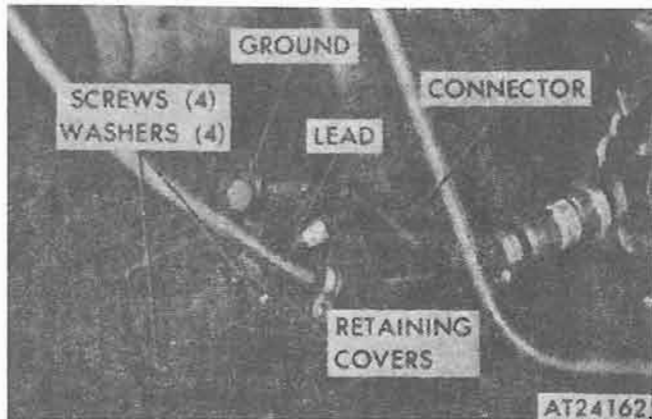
Disconnecting or connecting electrical connections at 60-ampere generator.
